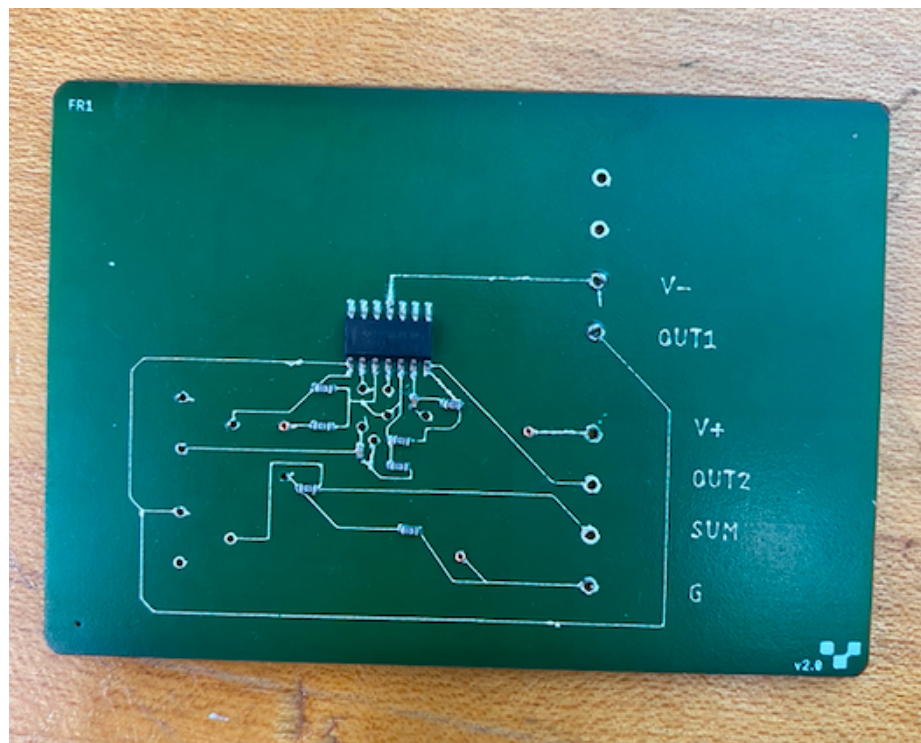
The copper rivets, which provide connections to the top and bottom of the board, fell out after soldering the surface mount pieces. The ones missing are near the chip, but some of the other ones did stay and are still visible.
